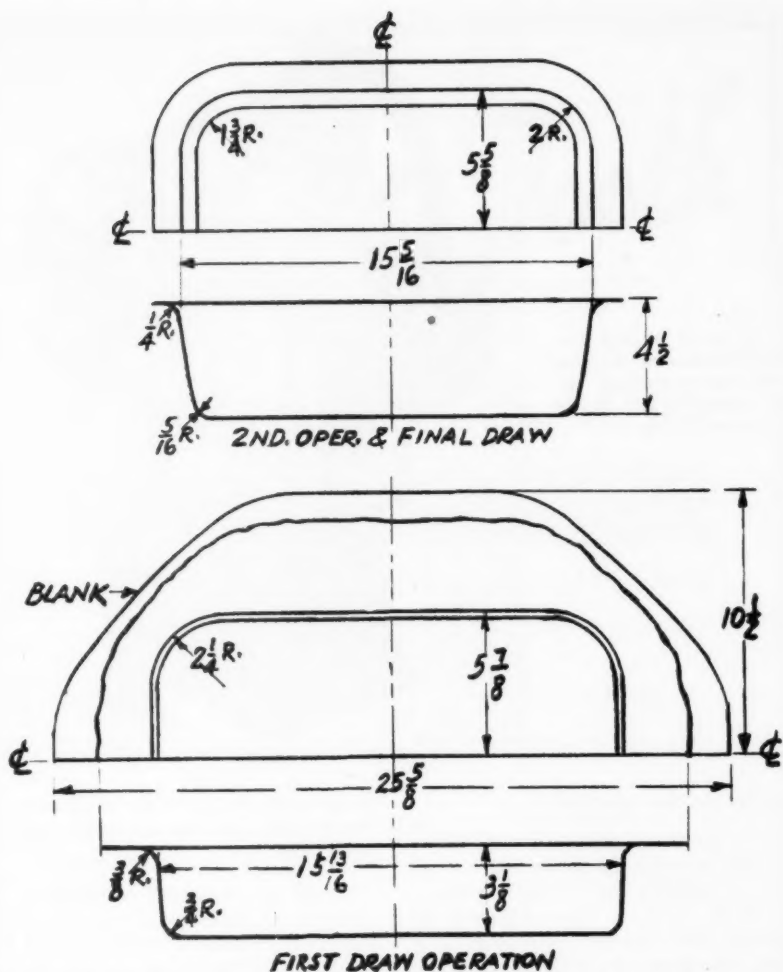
Typical first operation blank and draw, and the final redrawing operation in double-action dies, for producing a rectangular aluminum alloy pan.
